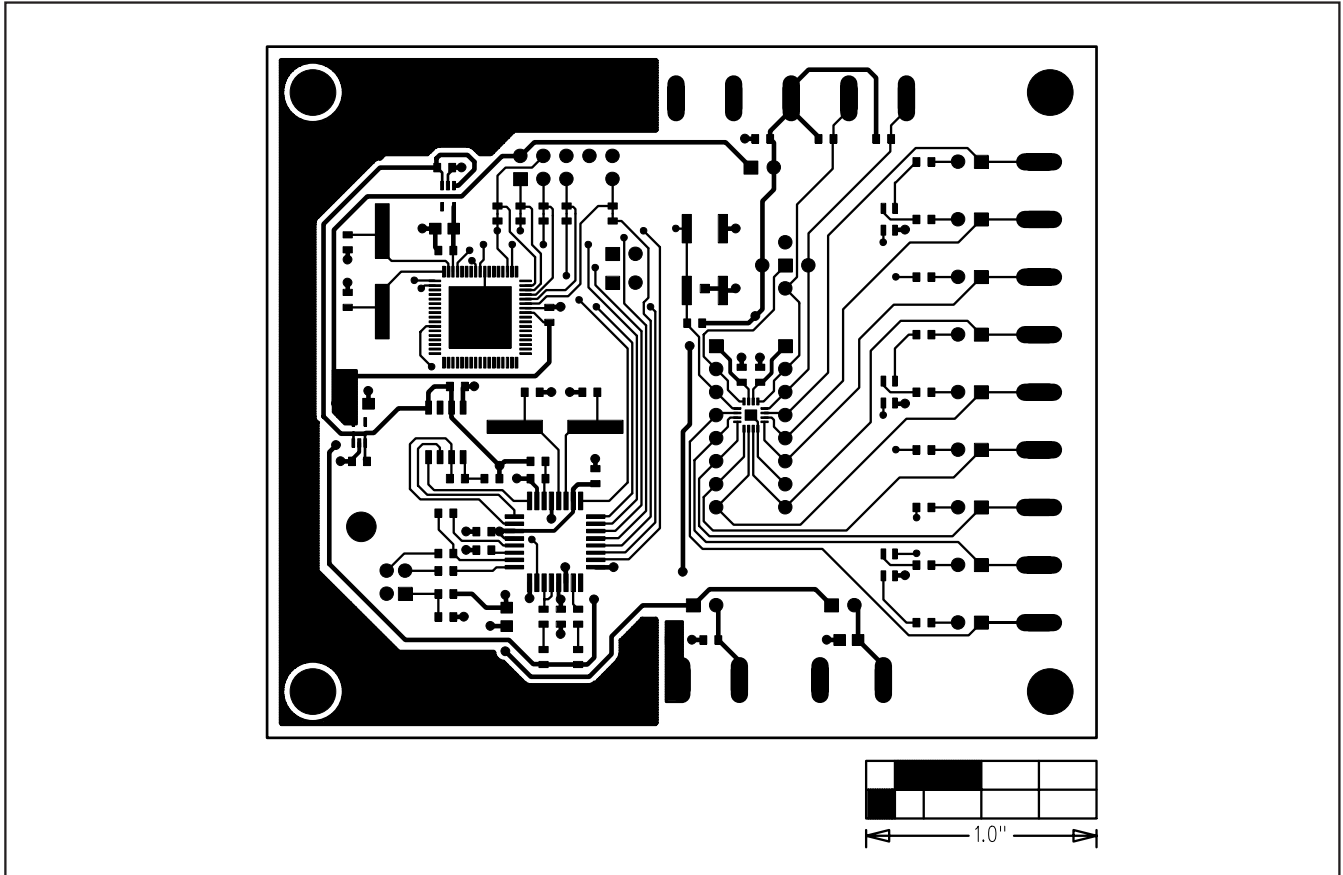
MAX7302 EV Kit PCB Layout—Component Side
